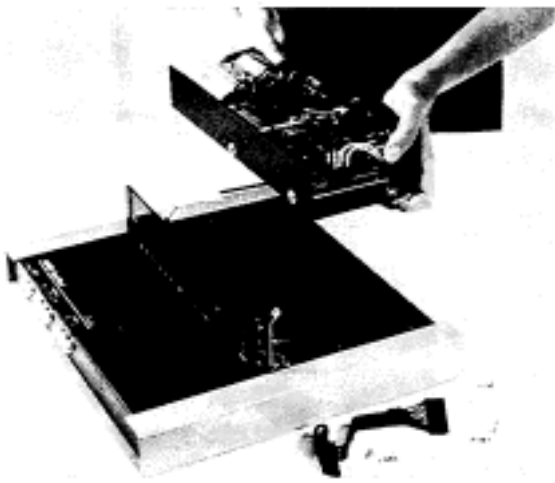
Removal of the power supply. The ribbon cable must be disconnected first. The display board can be left in place, but has been removed in this picture.
